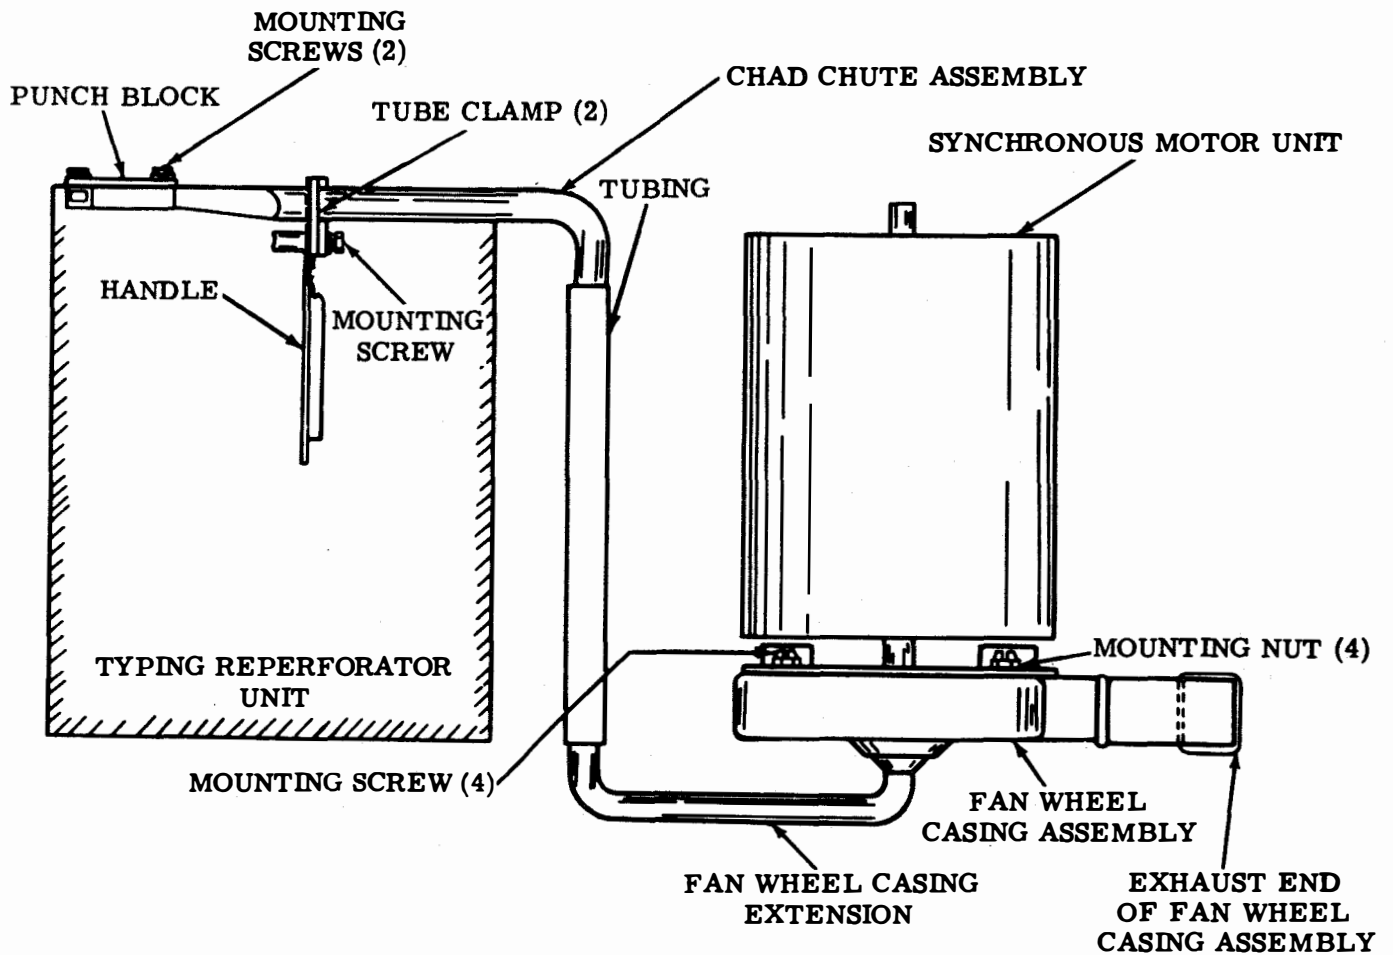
Vacuum Chad Disposal Equipment - Top View
